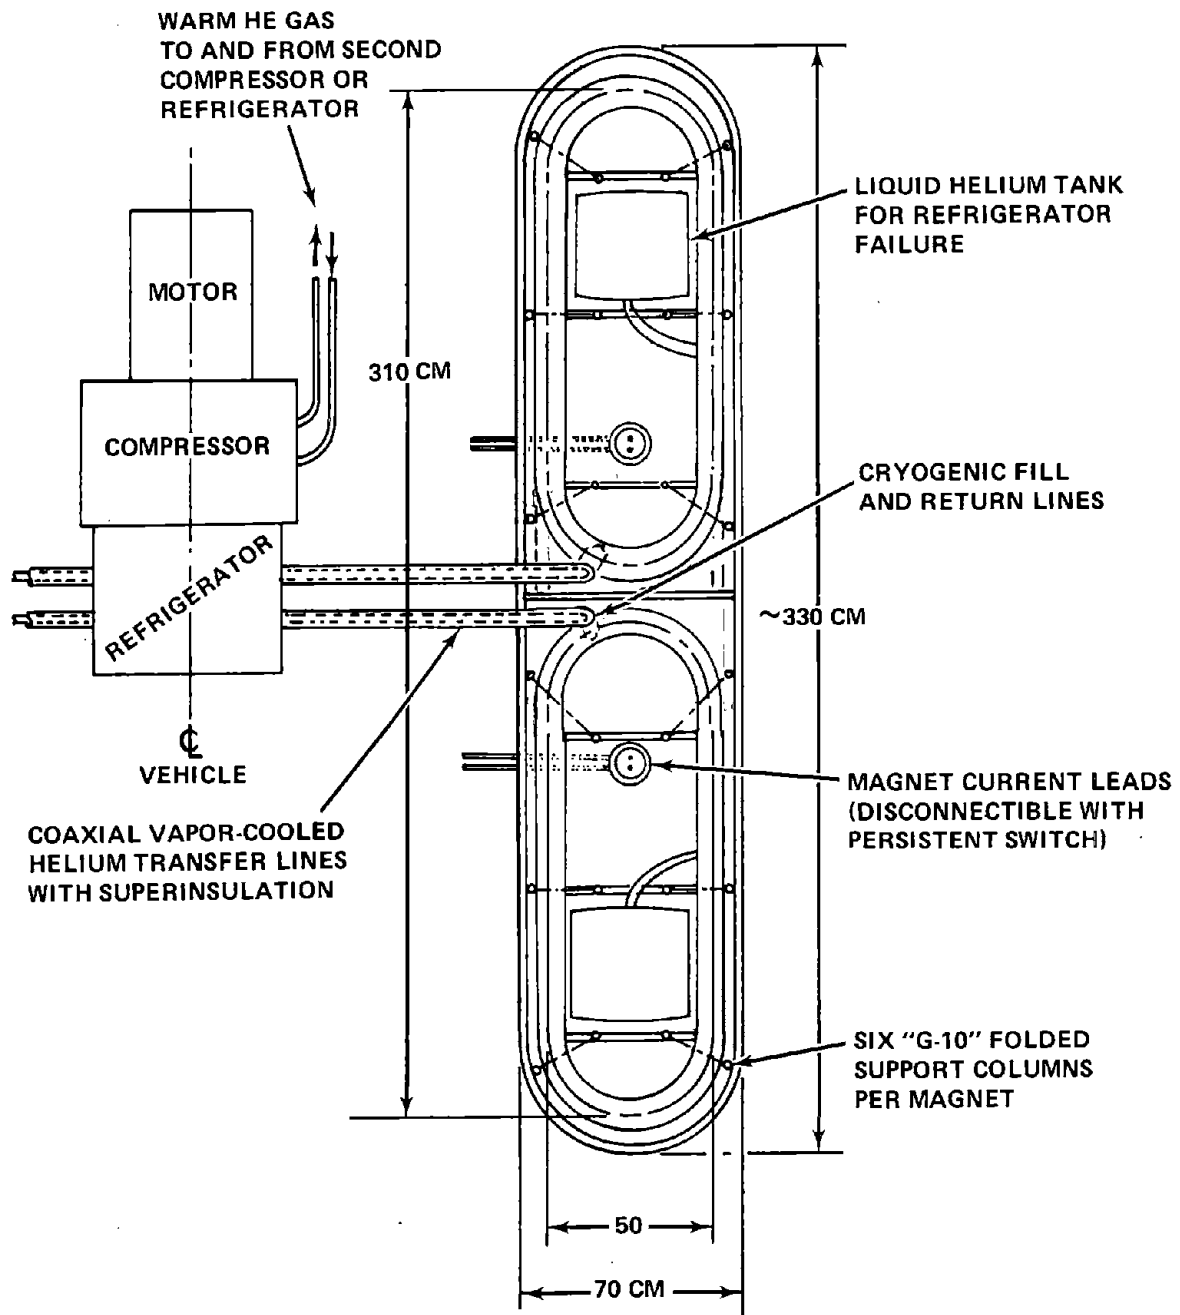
LAYOUT OF LEVITATION MODULE (WITHOUT SHIELDING COILS)
